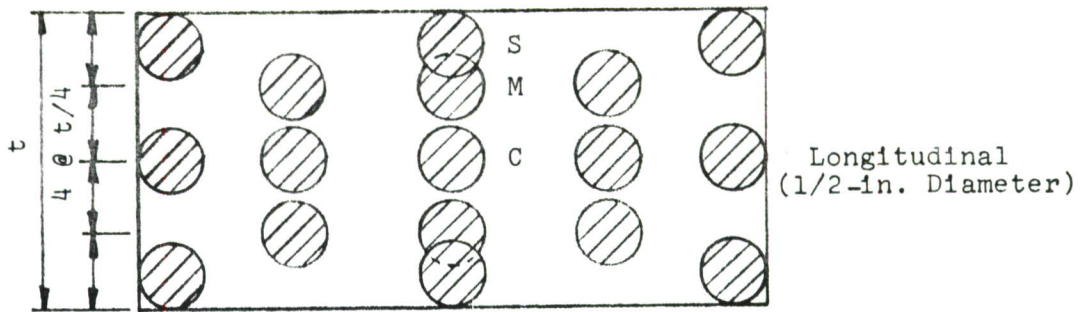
Locations of Tensile Specimens in 11/16x16-in. Extruded Integrally-Stiffened Panels.
